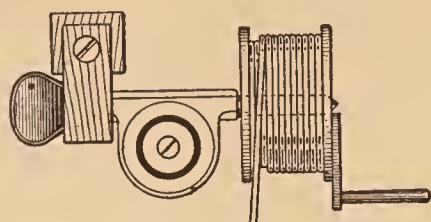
SMALL BOBBIN DRIVEN DIRECTLY ON COUNTER SPINDLE, TURNED BY HAND
